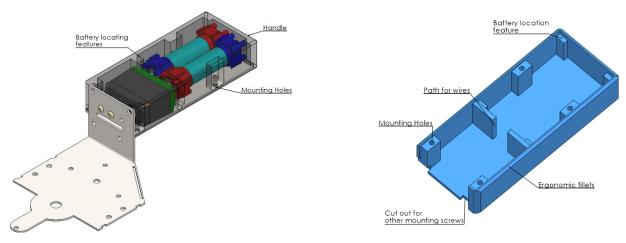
(Left) mounting and internal components of handle assembly (Right) Plastic handle
